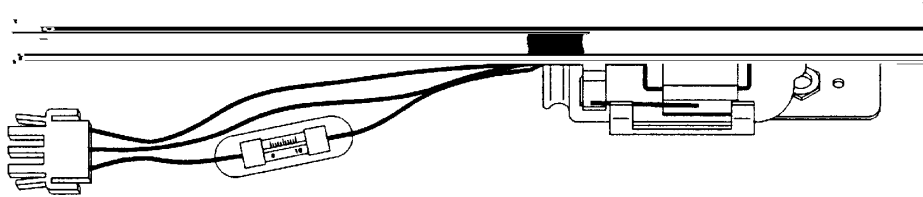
Prealigned Deuterium Lamp Assembly (B0160917)
